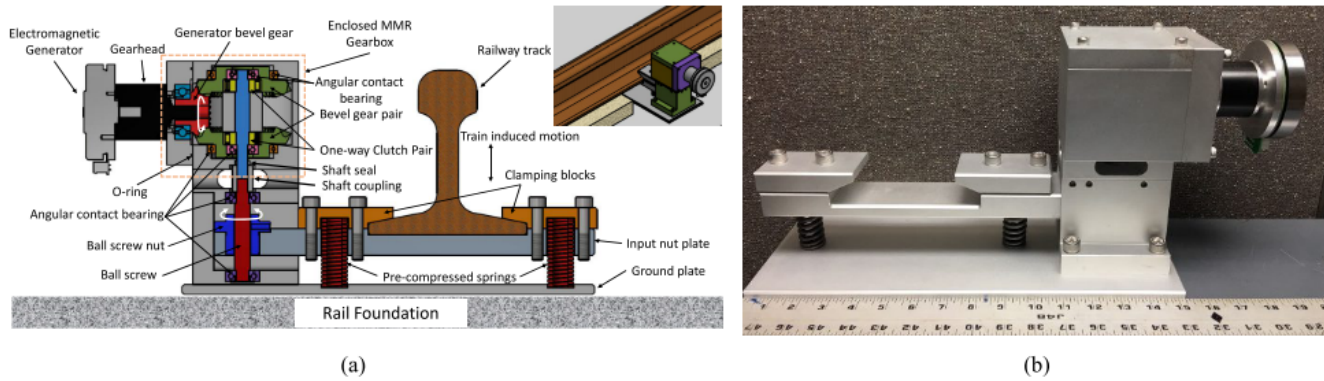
(a) Detailed design of ball screw based energy harvester and (b) Prototype. The ball screw mechanism converts linear motion into rotary motion to drive the generator and produce power [18].
